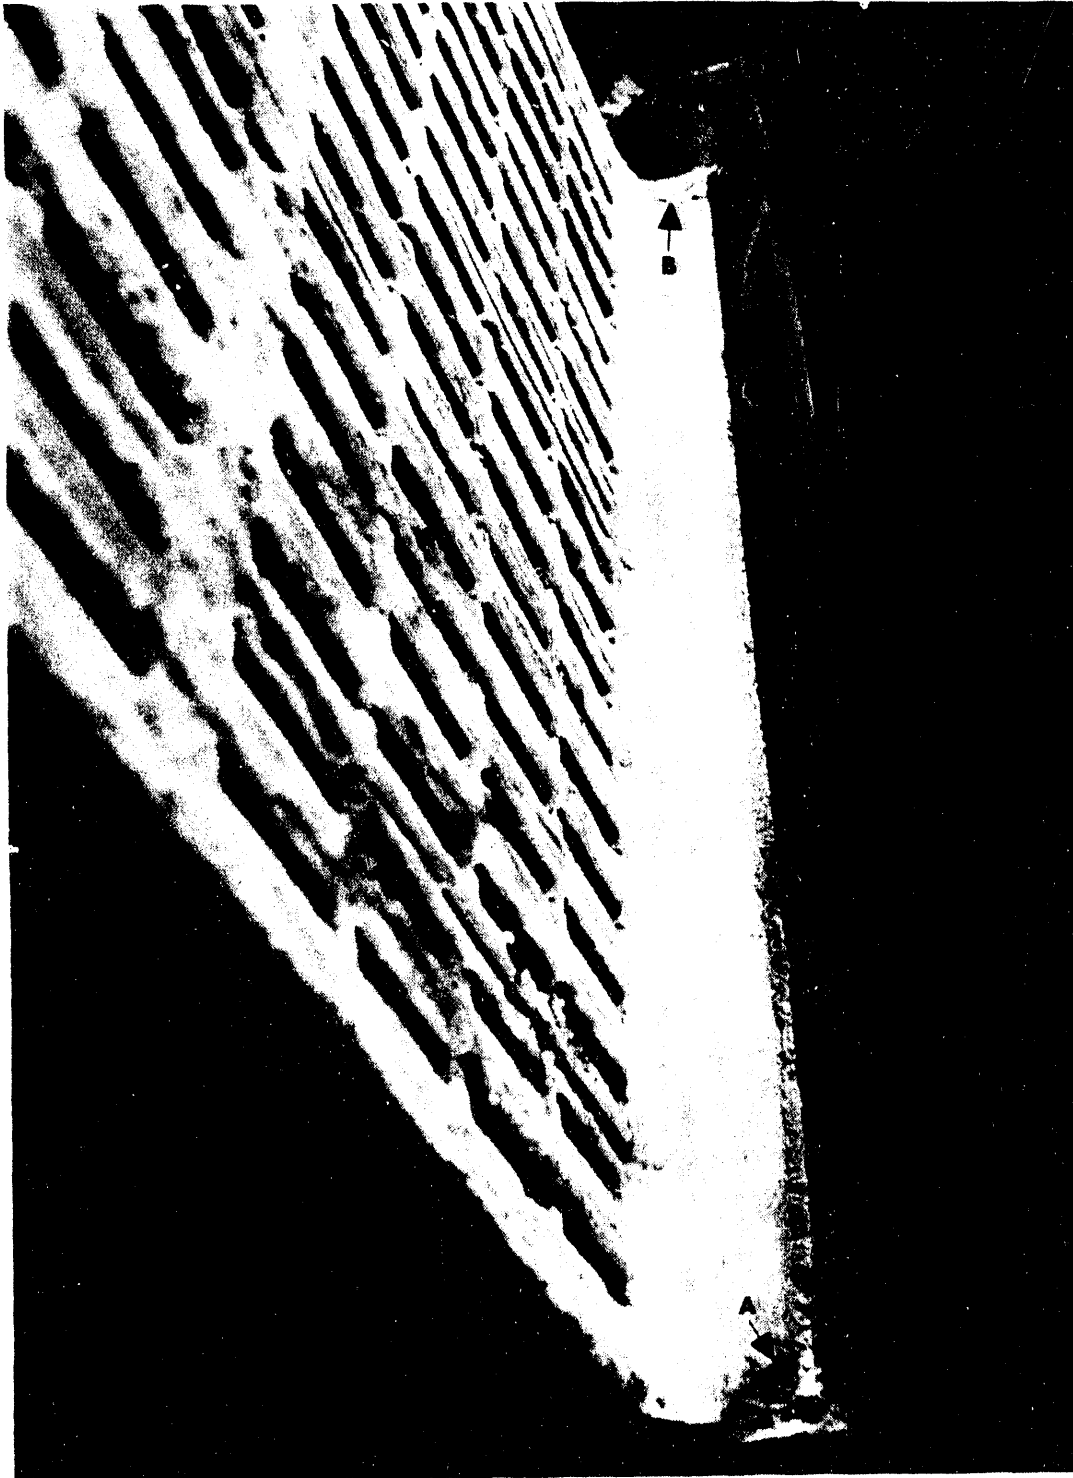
Top View of Filter, Shows Crushing and Cracking on Flange Corners and Accumulation of Dust in the Fixture Cavity
